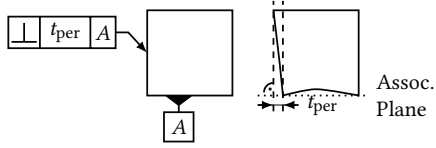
Perpendicularity Tolerance Zone
